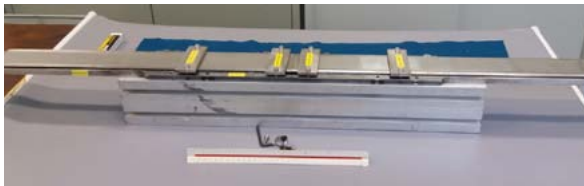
IEA-R1 reactor's control rod plate assembled for laser welding.
